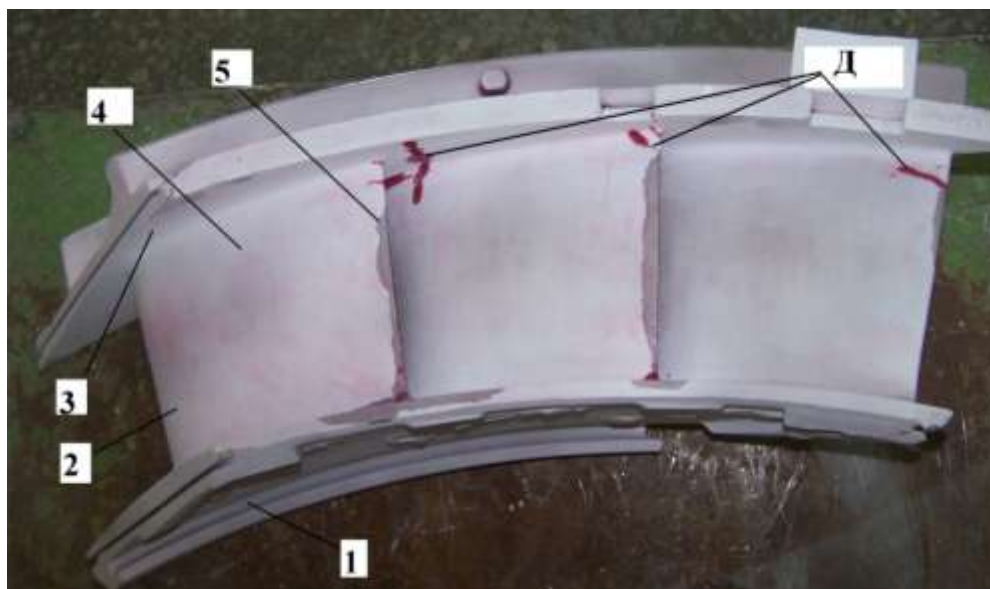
Blades block with typical operational defects, located, mainly, on the boarded with the top and the airfoil. (D – operational defects; 1 – block bottom; 2 – leading edge; 3 – block top; 4 – blade; 5 – trailing edge)
